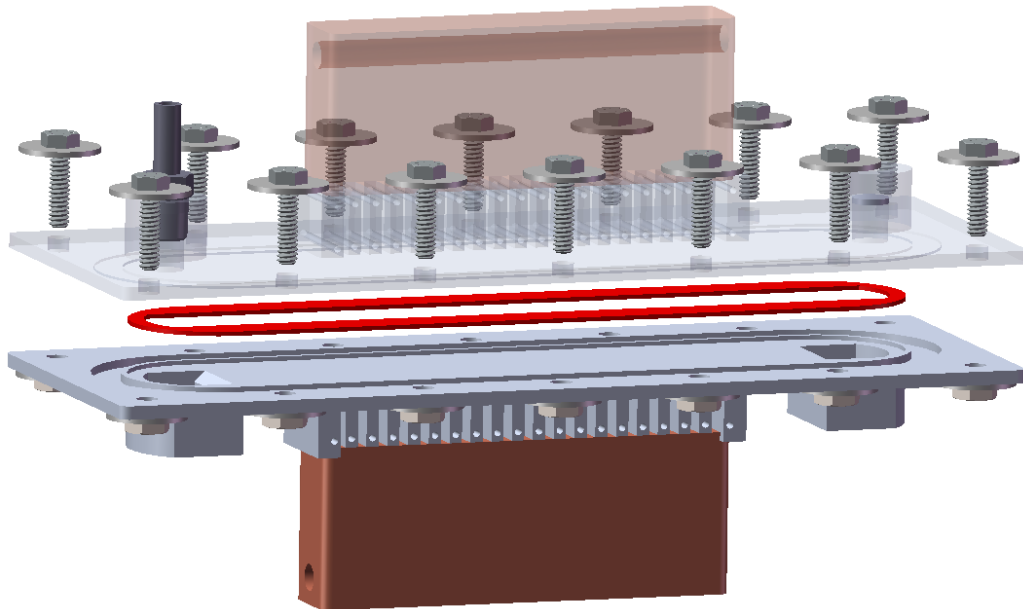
Exploded view of the alpha test section modeled in Solidworks
